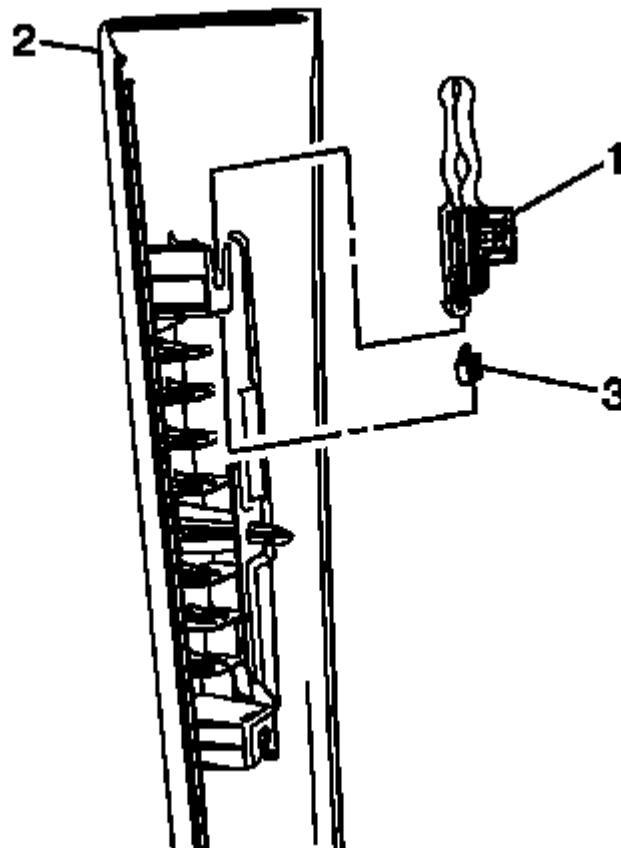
Windshield Side Garnish Molding Retainer Clips
